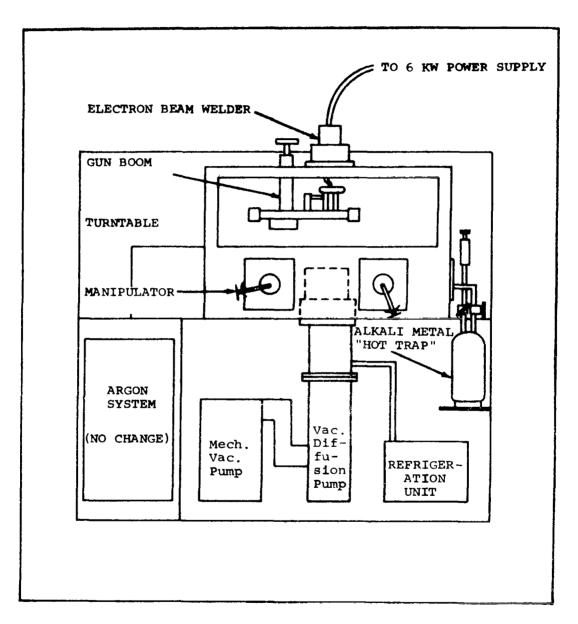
Schematic of the Capsule Fabrication and Loading Equipment
